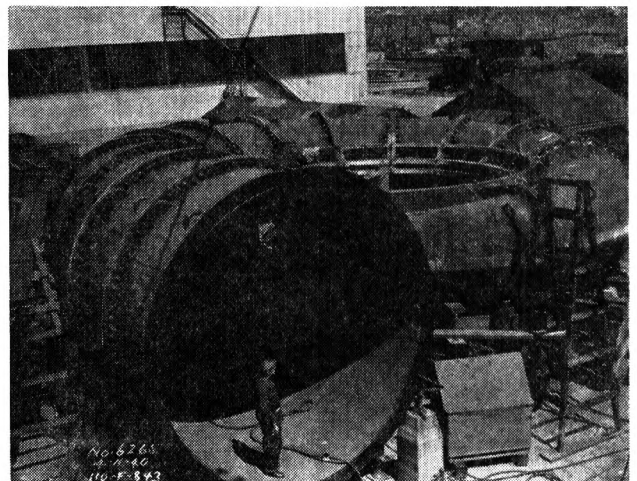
SPIRAL CASING ASSEMBLED AT MANUFACTURER'S PLANT
